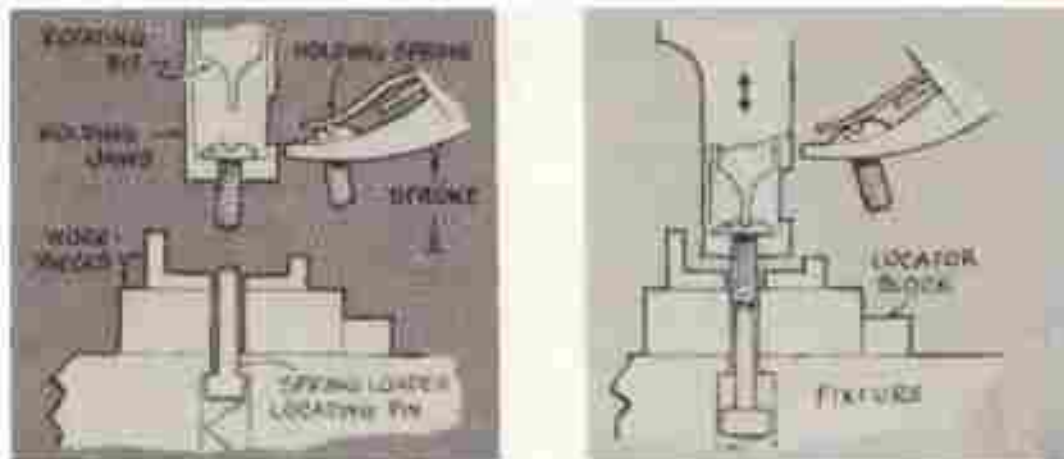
Automatic driving of screws. In (a) holding jaws receive the screw from the feeding and orientation system. In (b) the holding jaws move down with the tool until the screw enters the hole and contacts the locating pin
